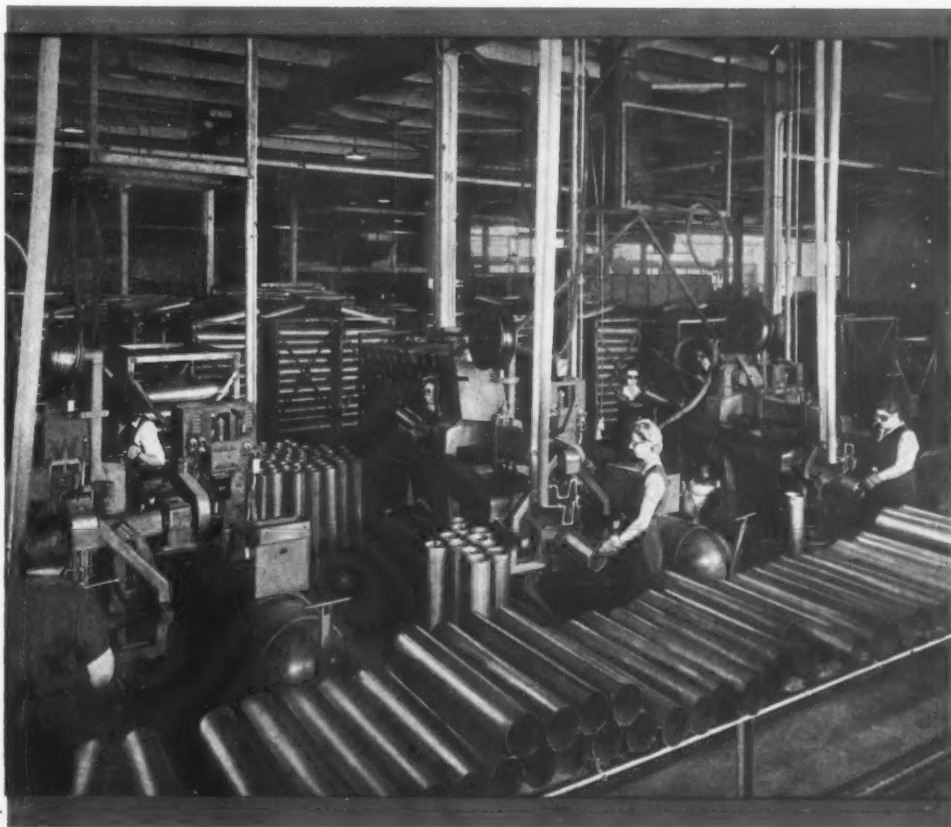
(Above Right) Feeding the Formed Cylinders underneath Gas Flames to Burn off any Oil that may be Left on the Surfaces to be Welded
